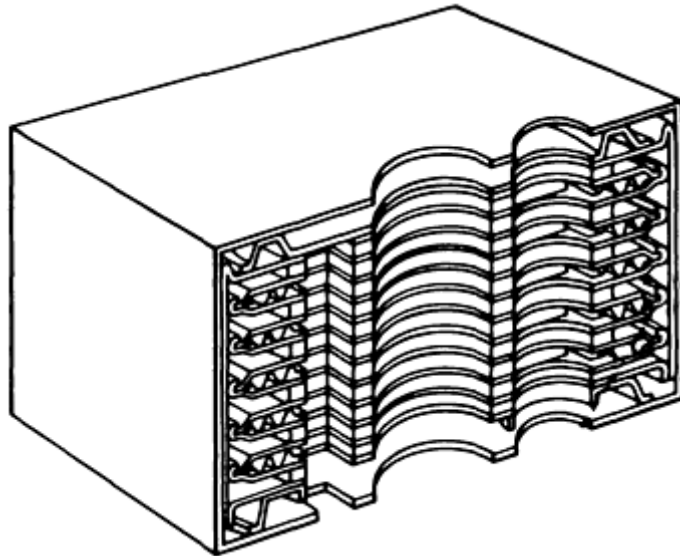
CUTAWAY VIEW OF A TYPICAL PLATE-TYPE HEAT EXCHANGER
